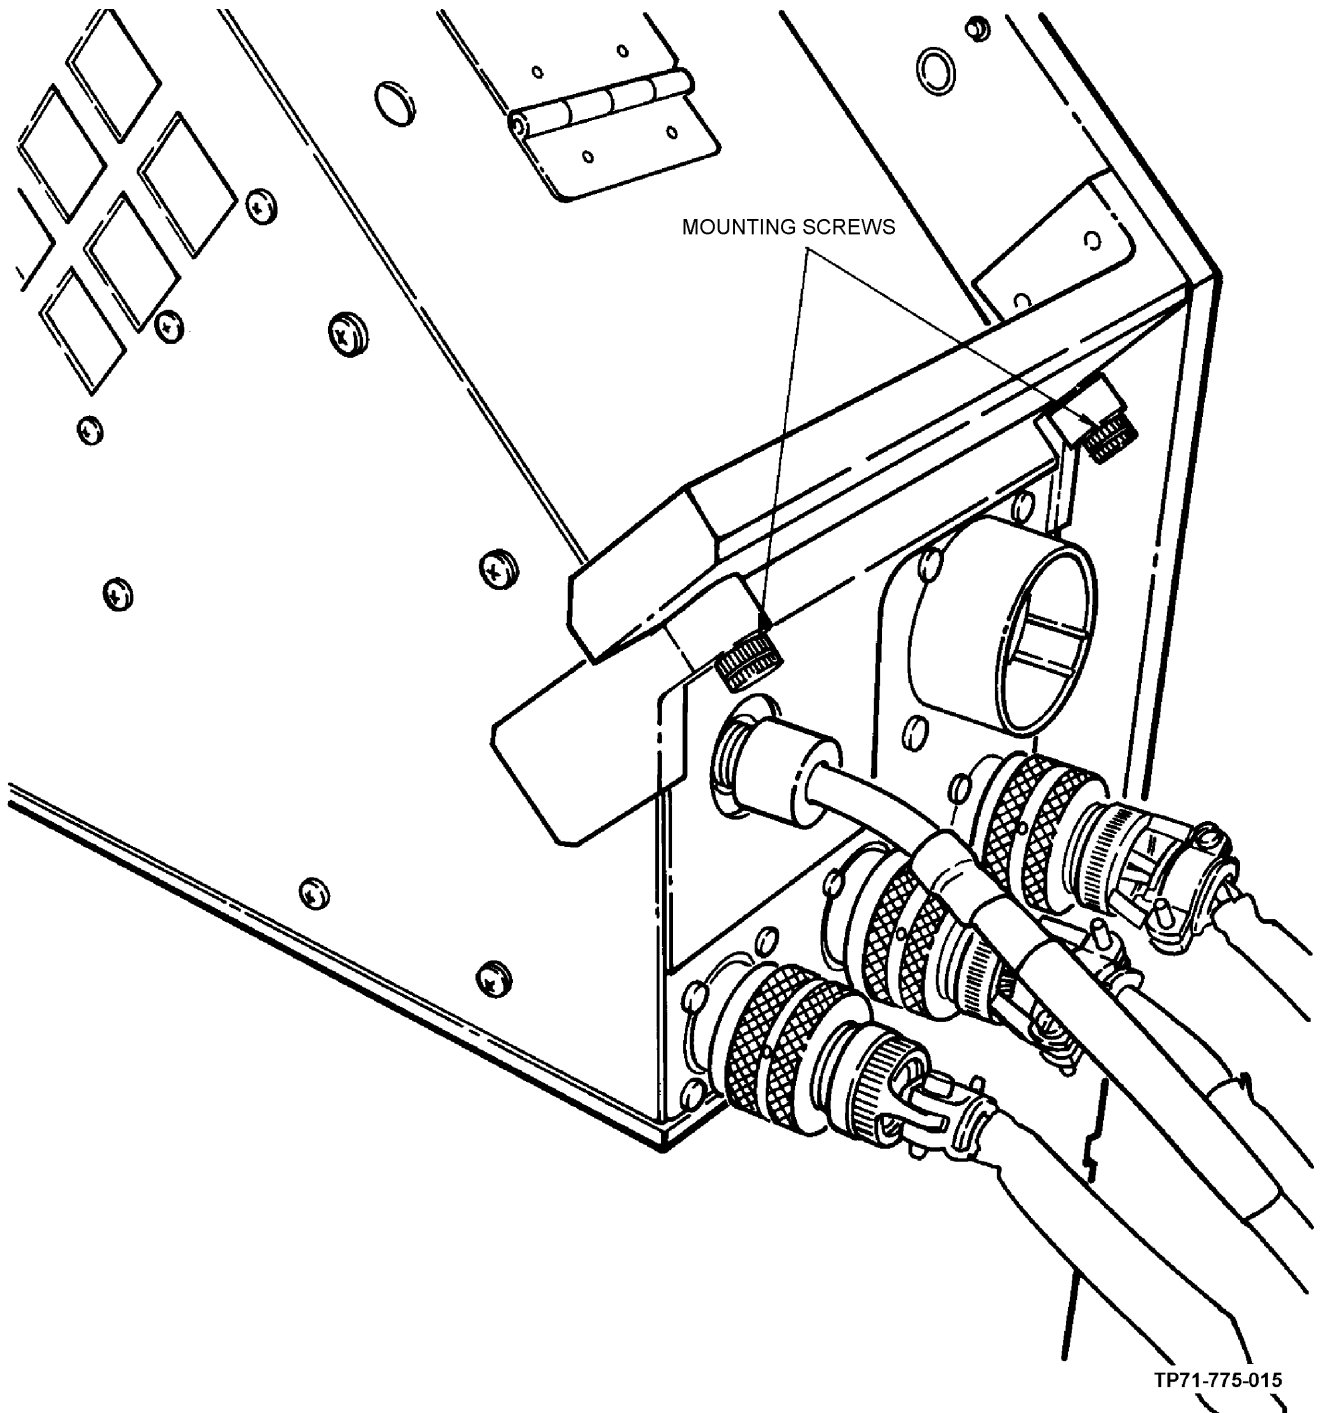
IVD Electronics Assembly Installation (Rear View)
